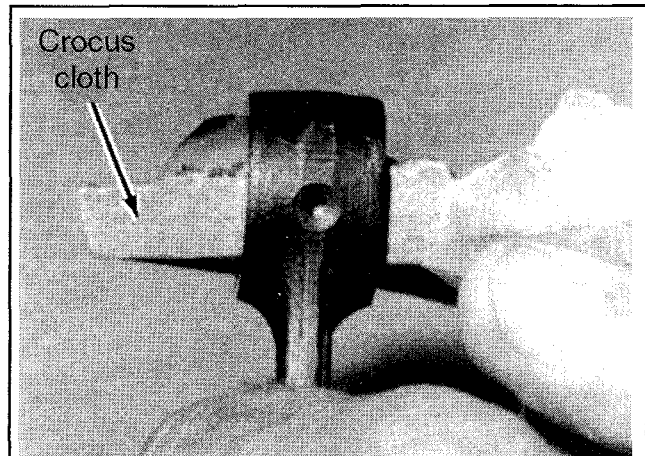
Never use anything more abrasive than crocus cloth to clean a bearing surface, like the piston end of this connecting rod
